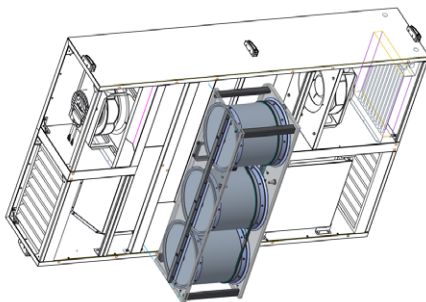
Cleaning and disassembly of the RR rotary exchanger.
